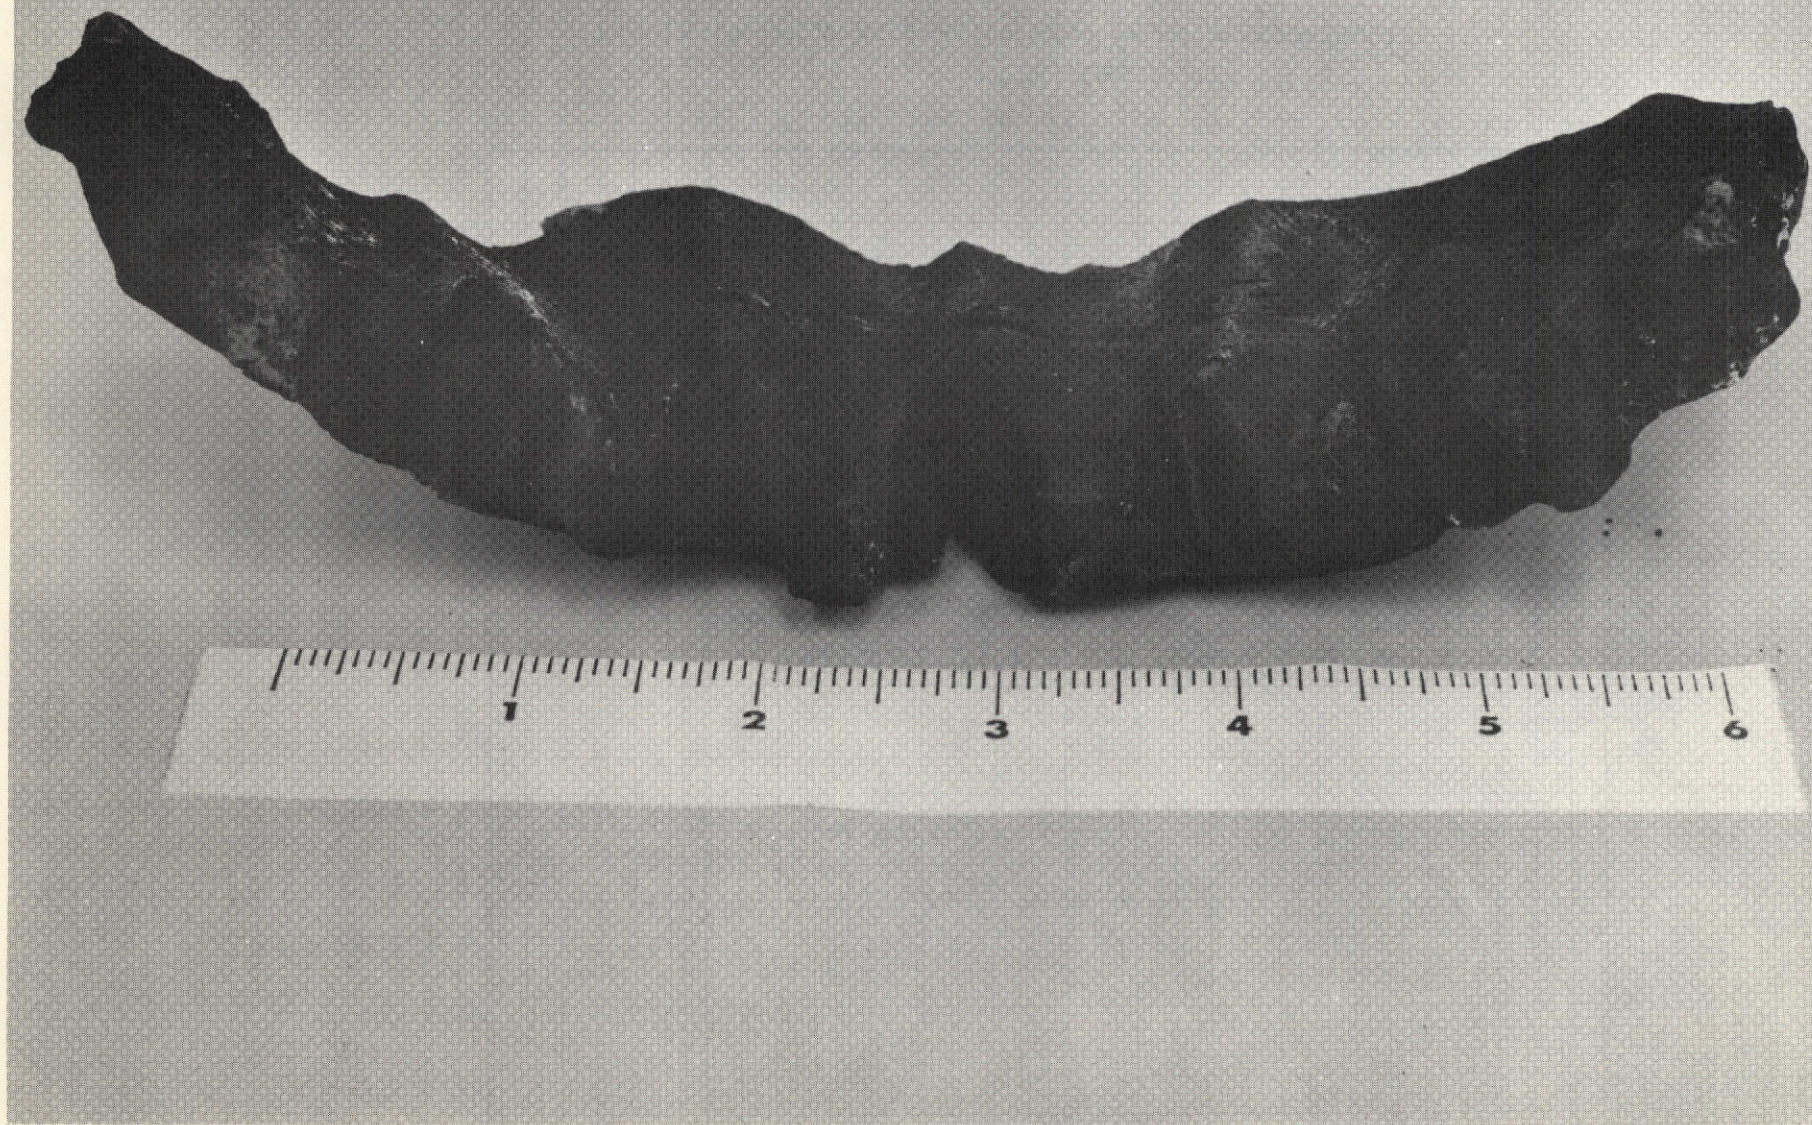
Retainer Ring Section (Showing Inside Diameter View) Ejected From Motor at 29.4 Seconds
